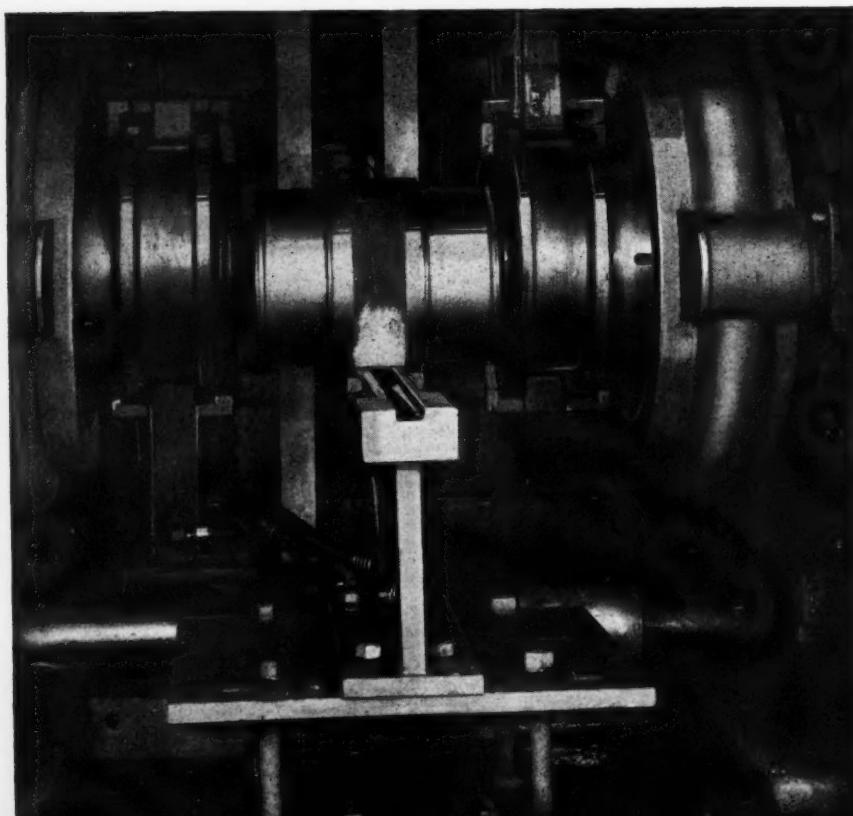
Close-up View of One of the Assembling and Hardening Machines, Showing the Rollers and Hub at Combined Loading and Quenching Station
